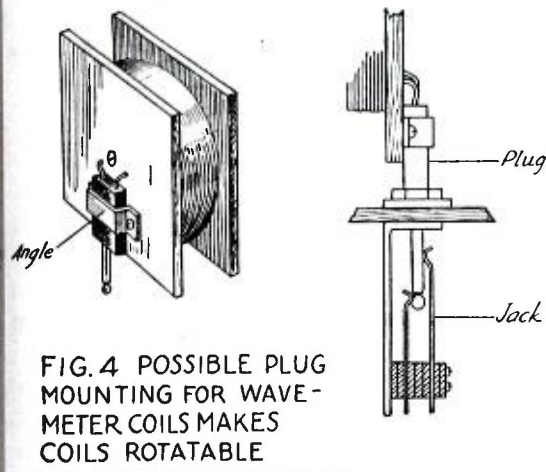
POSSIBLE PLUG MOUNTING FOR WAVE-METER COILS MAKES COILS ROTATABLE
